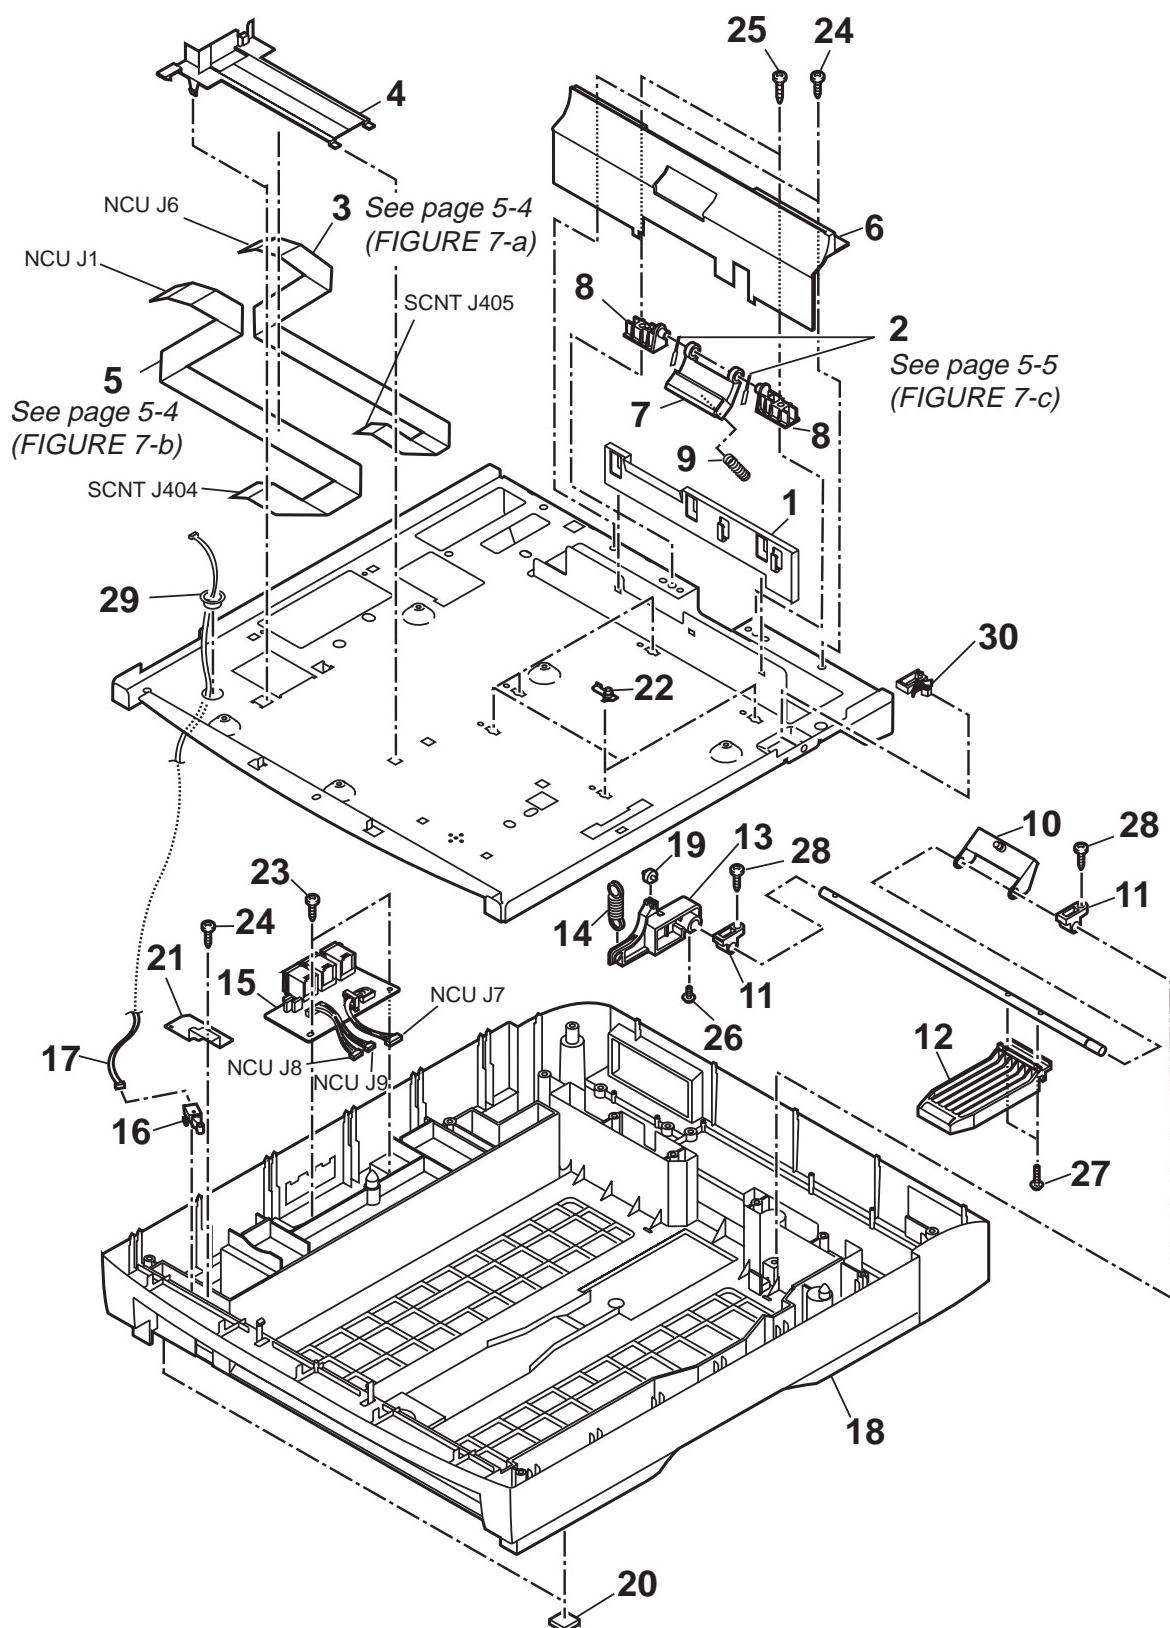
CIRCUIT BOARD & PAPER PICKUP SECTION
